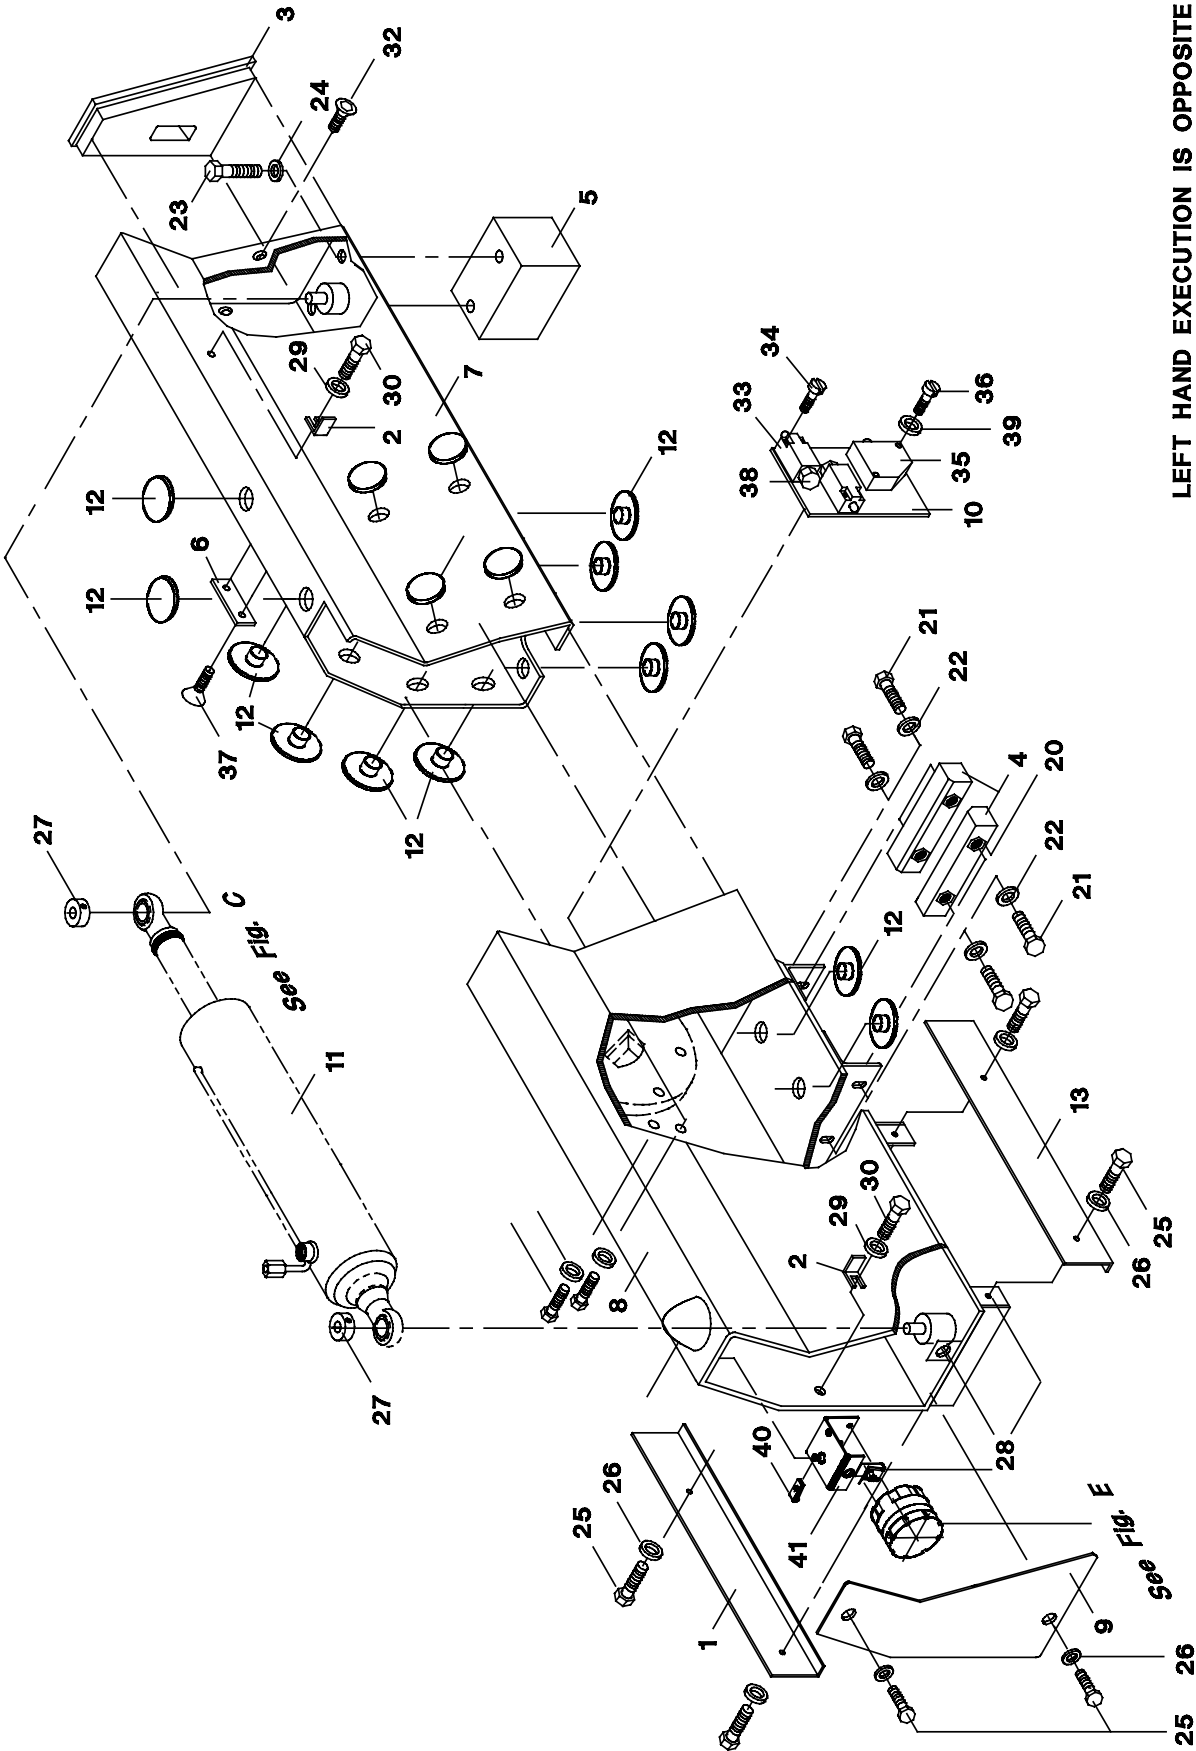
FIG. H - ASSEMBLY CROSS-HEAD HIGHER (OPTION)
